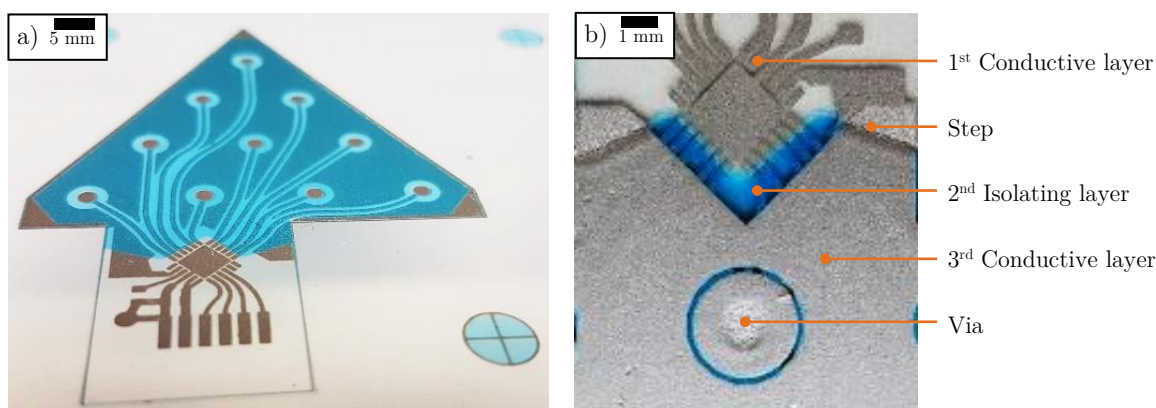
a) Printed bottom layer (silver) of a PCB with isolation layer (blue). b) Magnification of a section of the final print showing some distinct differences to conventional PCBs.
